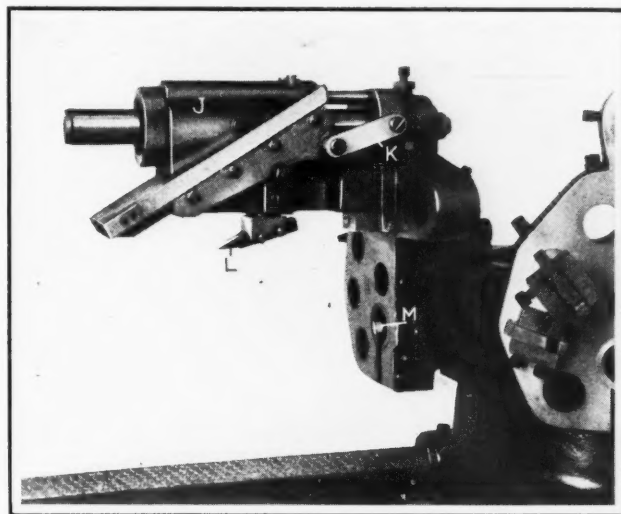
Special Device designed for finishing the Taper Under-cut Surfaces of the Flange
